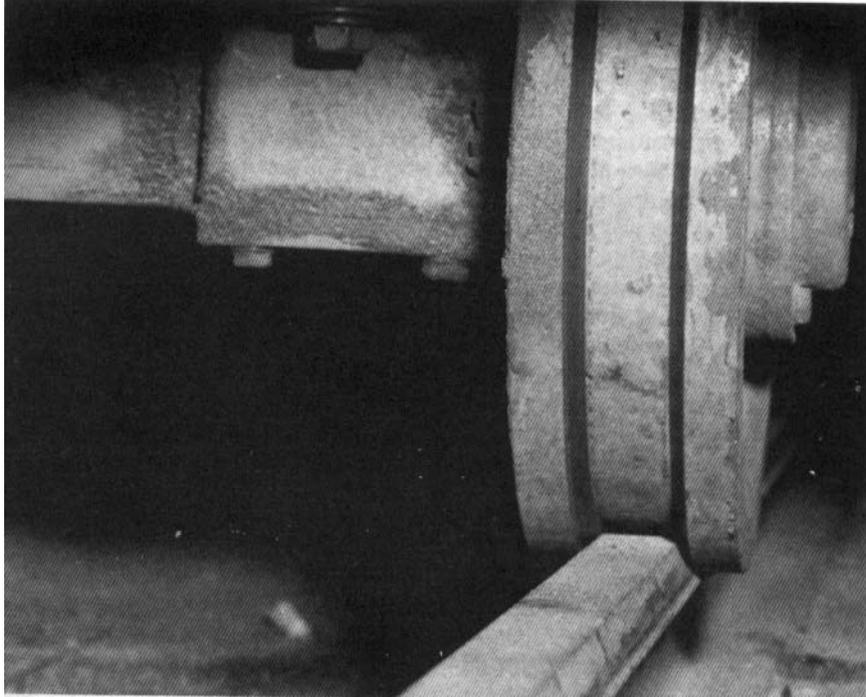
A proper fit between the guide wheel and rail is evidenced by the wheel riding the bevel of the rail without the bottom of the wheel end the top of the rail making contact.
